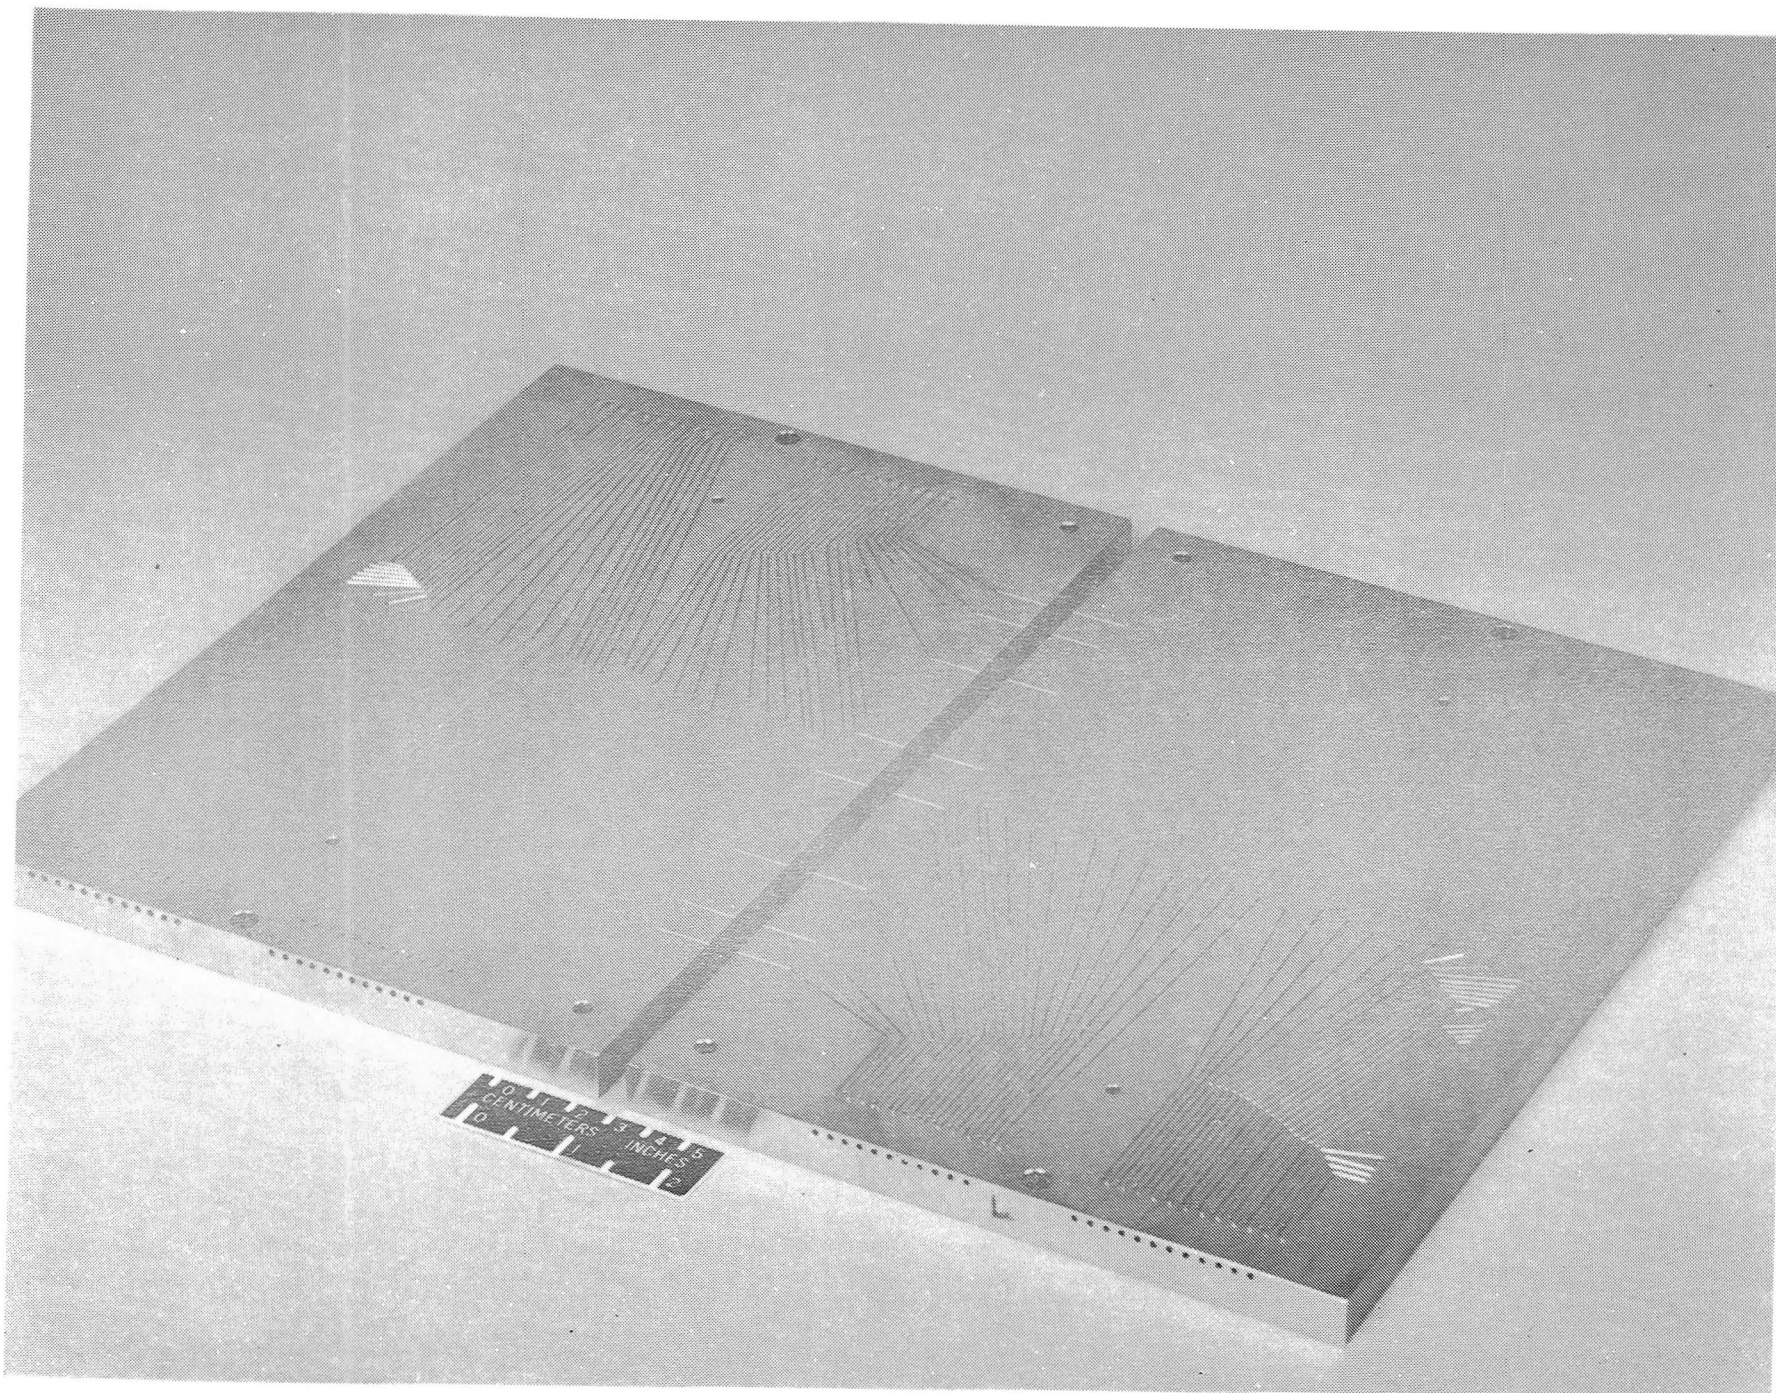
Plates for symmetrical airfoil model shown prior to brazing to illustrate pressure channel layout.
